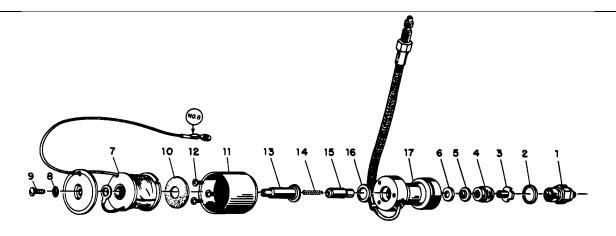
Fuel Nozzle and Solenoid Valve Assembly
